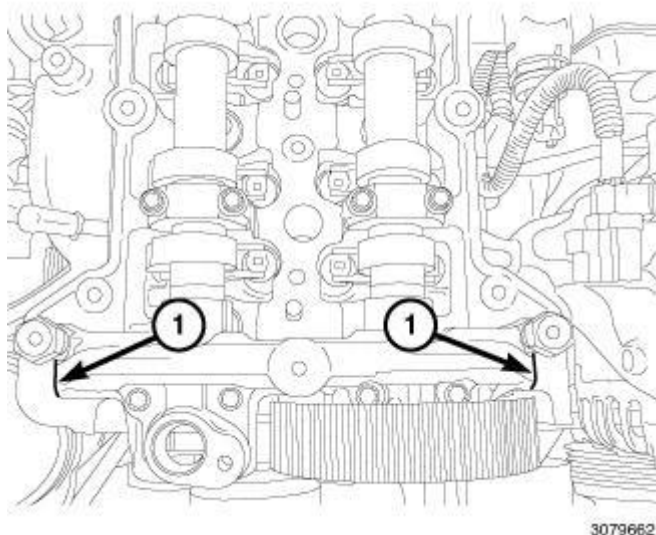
Locating Application Marks Of Bead Of Mopar® Engine Sealant RTV
